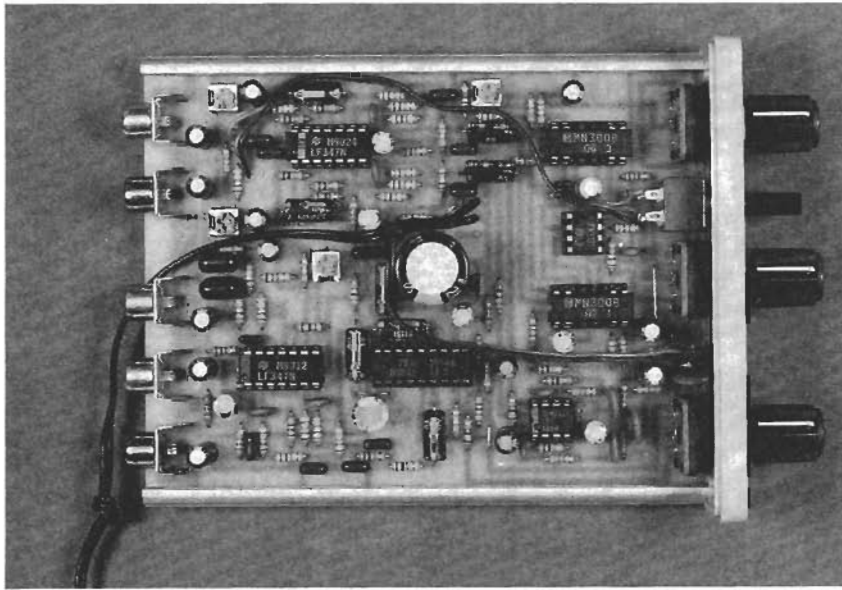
Inspect the completed board for bridged foil paths and missed solder connections before you slide it into the guide rails of the case.
